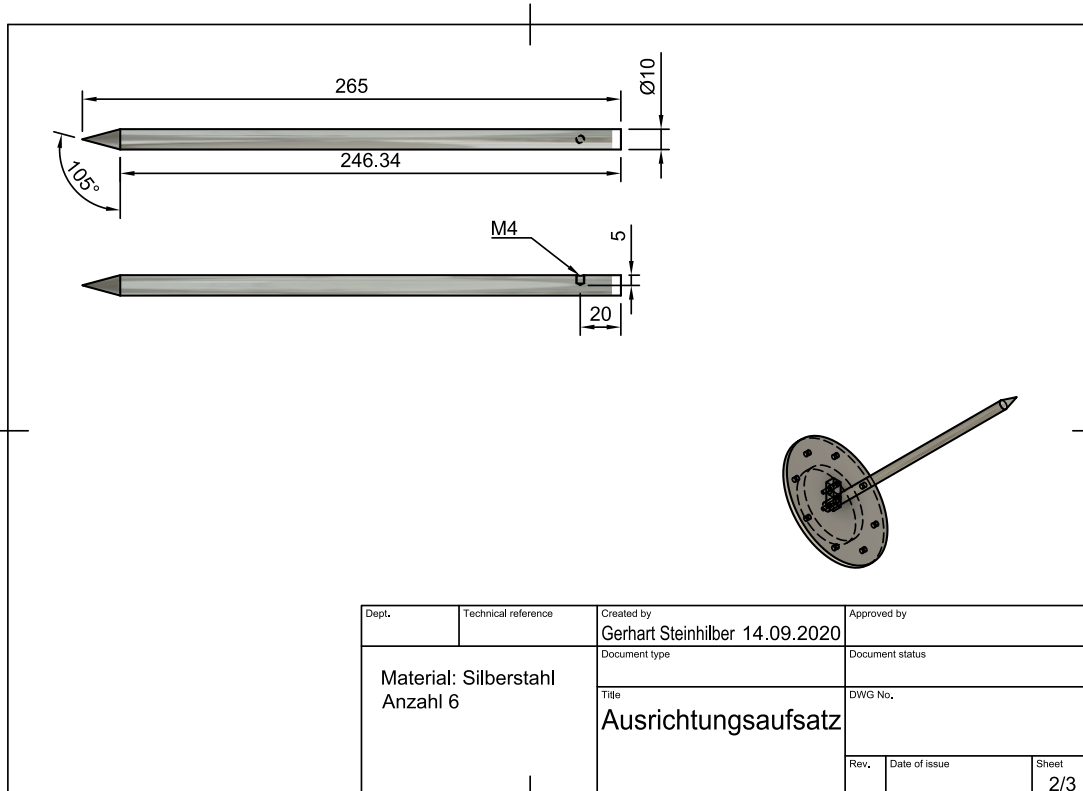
Technical drawing of the attachment for alignment of LaBr₃:Ce detectors.
